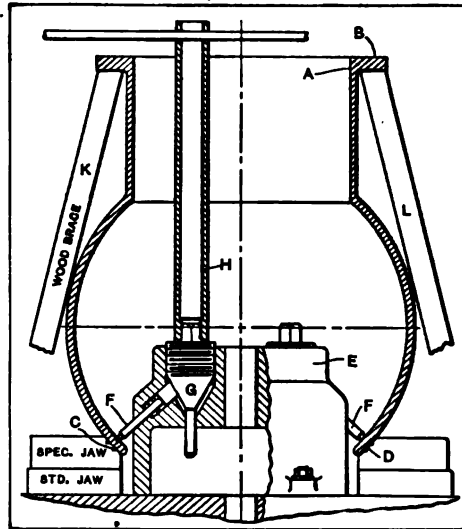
Vertical Boring Mill Fixture for Holding Large Ball Joint
